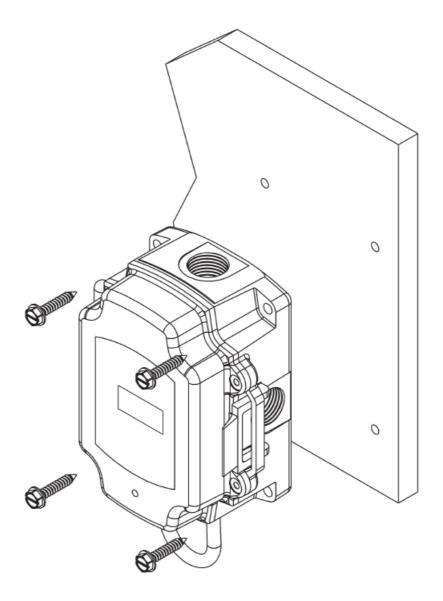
ZPM BAPI-Box Mounting (for units without Attached Tube option)
